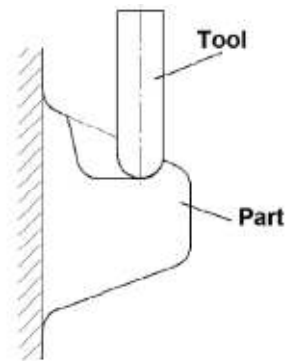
Forming Using Multiple Set-Ups Or On Multi Axis Machine Tools
